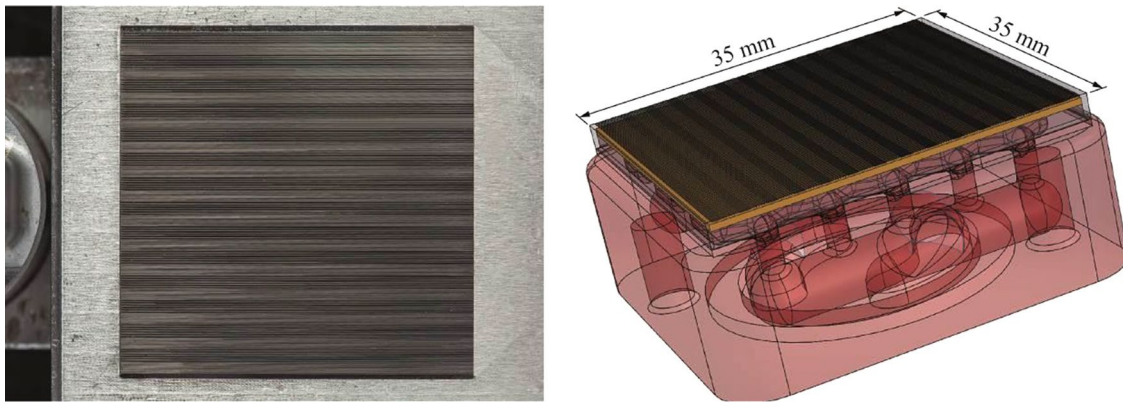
Rapid Tooling mould insert with lamellar microstructures (left picture of the assembled insert, right CAD drawing of the insert with illustration of the cavity near cooling channel geometry)
